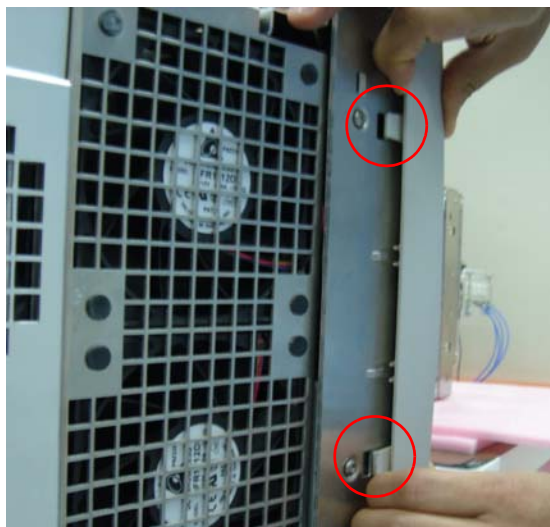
Remove the nuts at the sensor connector and the N-type connector
